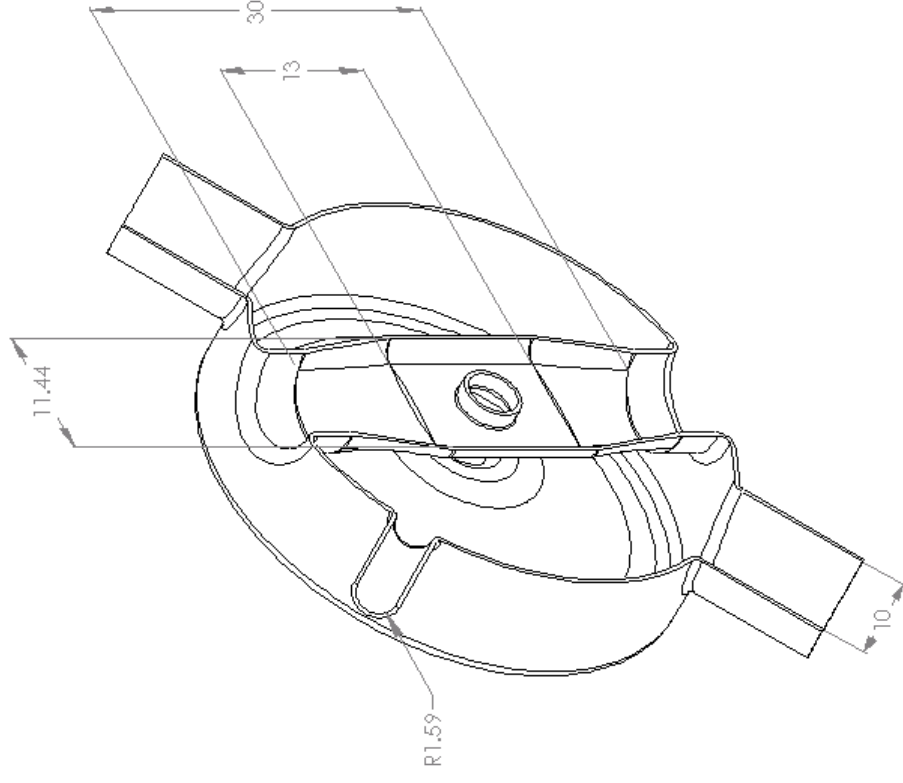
Lengthwise Cavity Section View with Dimensions, All Dims cm.
